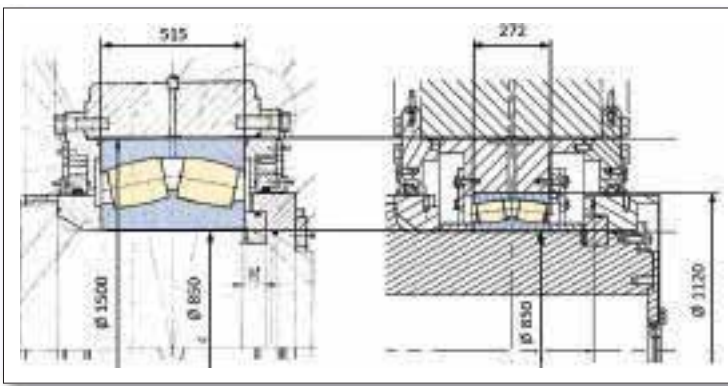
Main bearing arrangement before (L) and after (R) revamping
